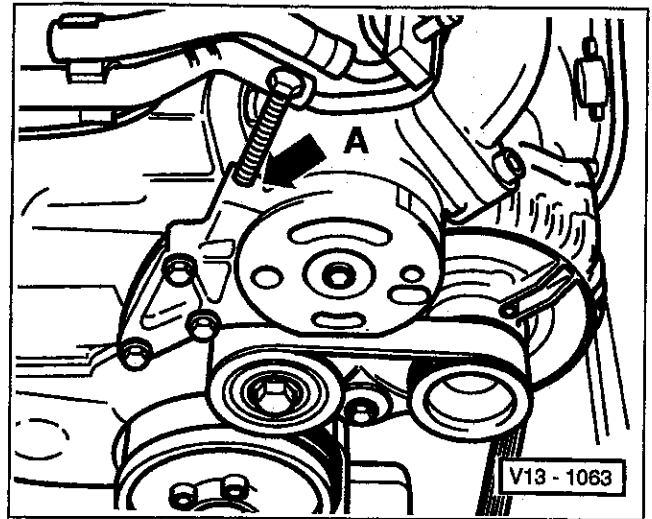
To relieve poly-ribbed belt tension on 6-cylinder engines, thread M8x80 bolt (A) into tensioner until belt is free of tension.
